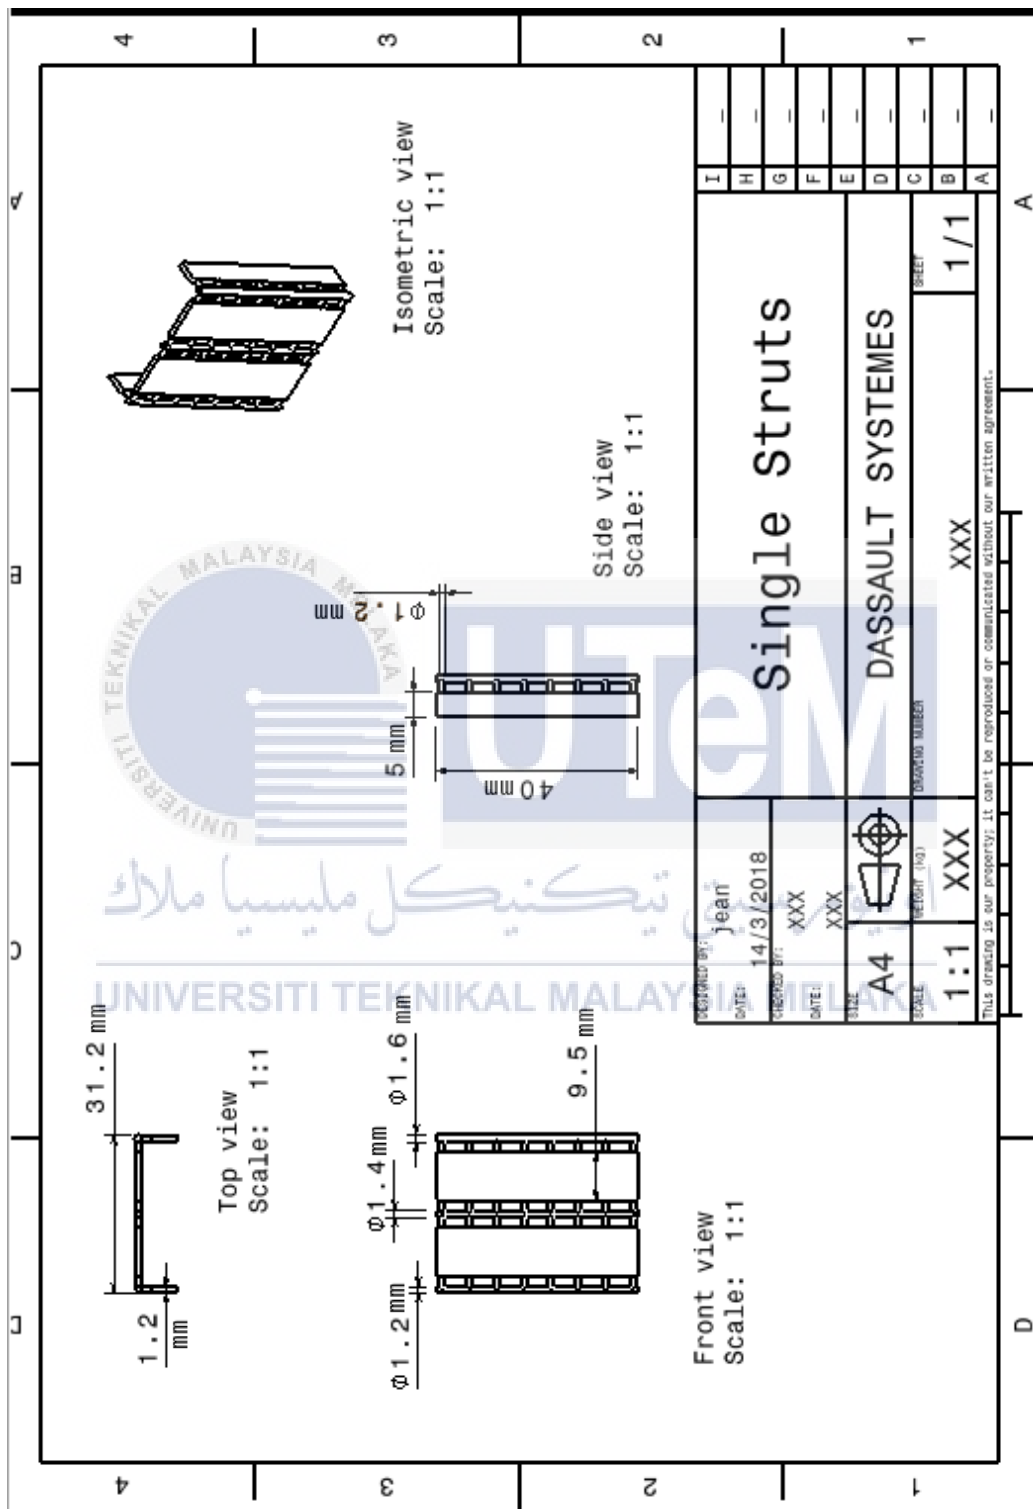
The dimension drawing of single struts with 0° using CATIA.
